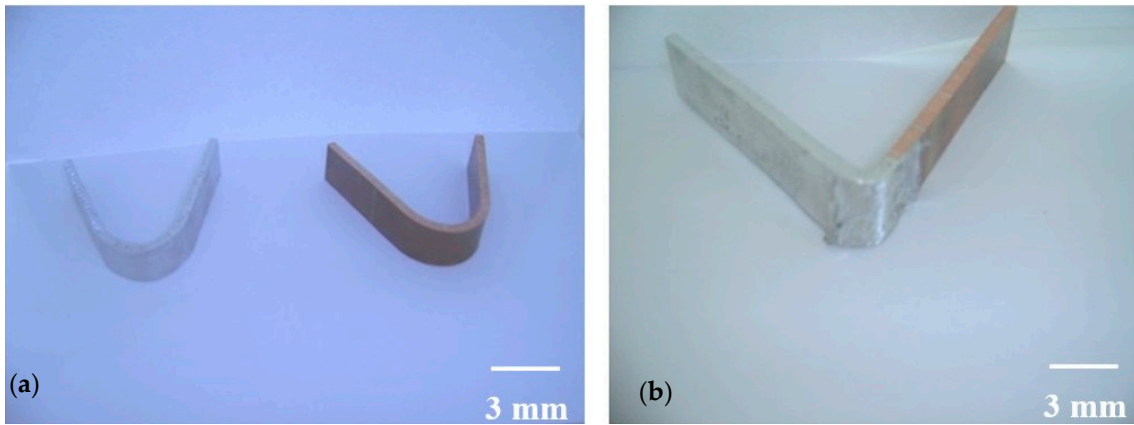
Bending test results of (a) base materials, (b) welded parts.
